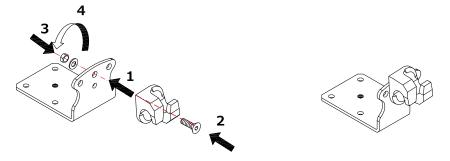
Assembly of the LVB/LVBD device with an aluminium cable support (Cod. 001094)
